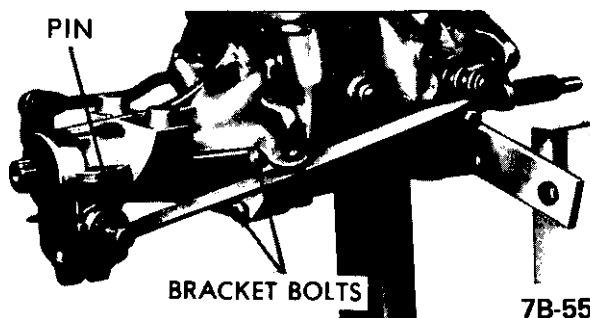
B-55 Pin and Bracket Securing Selector Lever to Intermediate Shaft and Bearing Retainer
